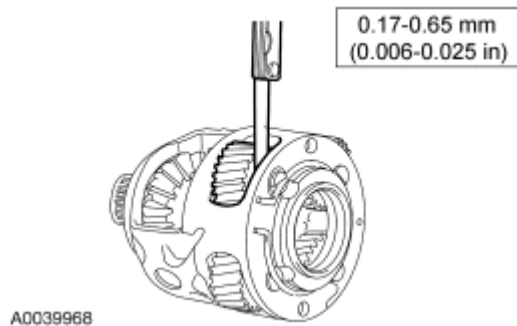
Measuring Final Drive Planet Gear End Play With Feeler Gauge With Specification
